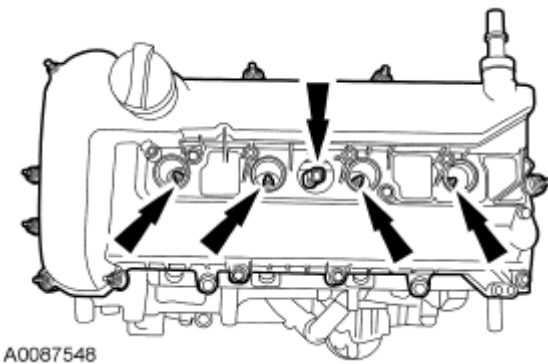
Locating Cylinder Head Temperature (CHT) Sensor & Spark Plugs
